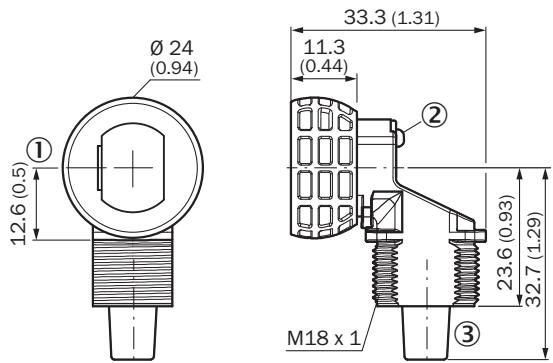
ZSE18-5xxxxx / ZSE18-Exxxxx, cable
